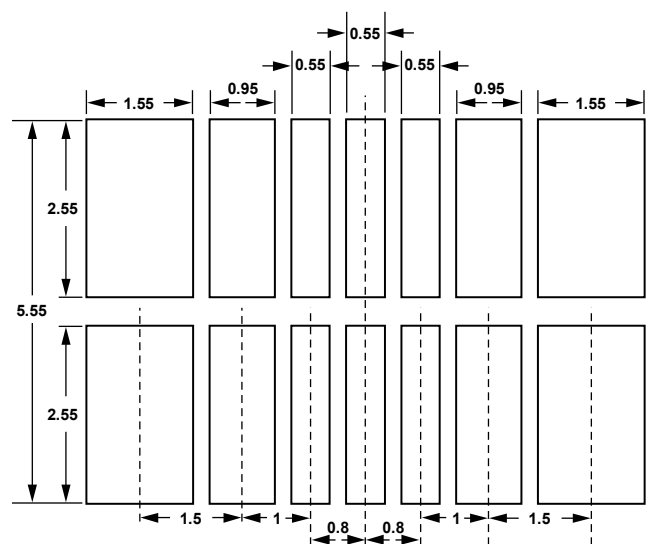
Sample LCC_V Solder Pad Layout (Land Pattern), Dimensions Shown in Millimeters, Not to Scale
